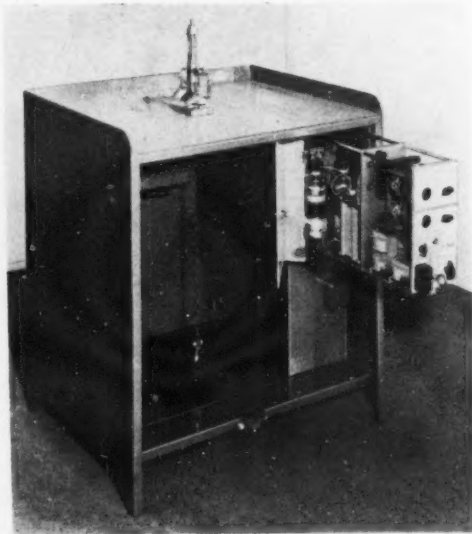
Sciaky BSF.1 Bench Spot-welding Machine
